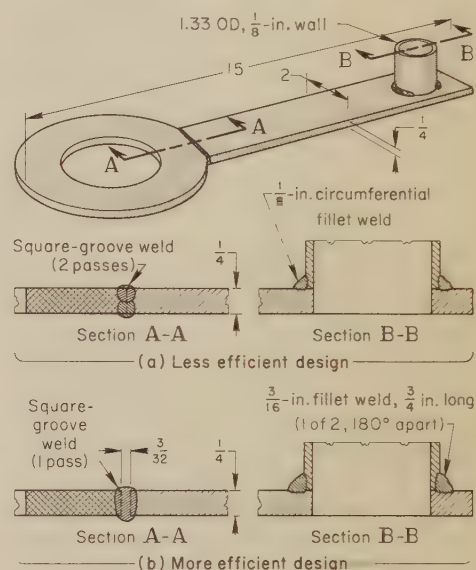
Three-piece weldment for which change in size and placement of fillet weld would allow use of same wire-feed rate for both welds, and would improve joint accessibility
